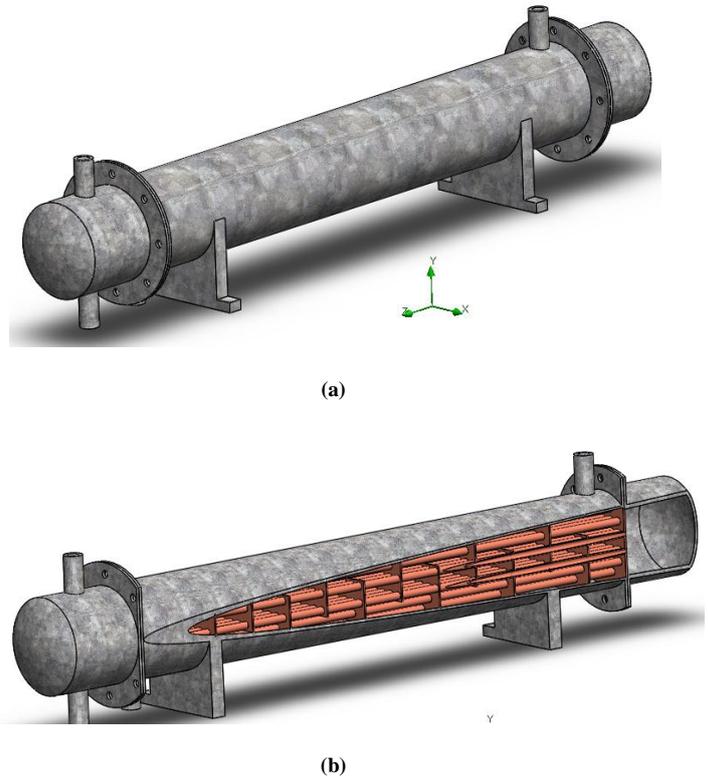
(a) Isometric View of the shell and tube heat exchanger, (b) Section view of the shell and tube heat exchanger
